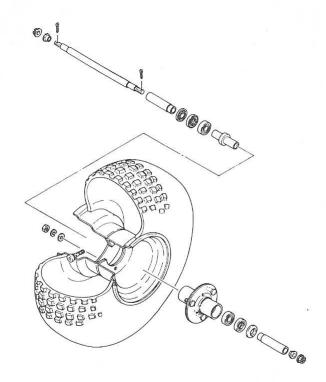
Typical front wheel/axle components — exploded view (YT 125 shown) (Sec 3)
